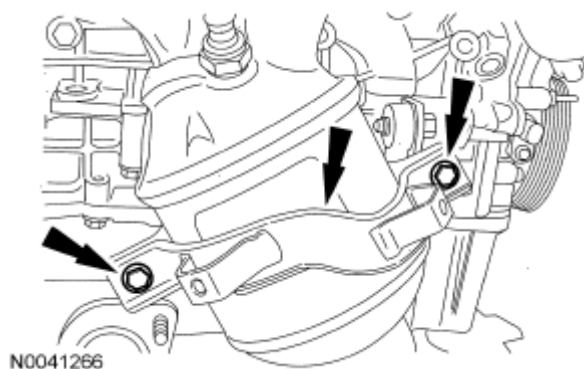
Locating Catalytic Converter Bracket And Bolts
